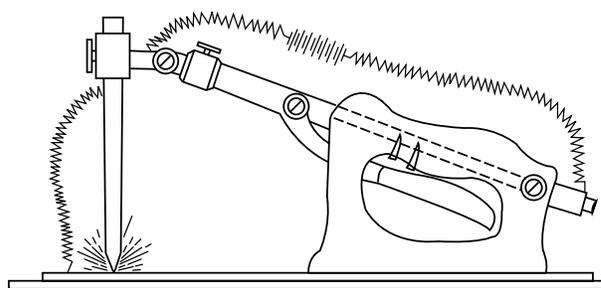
Original carbon electrode welding apparatus — 1885.
